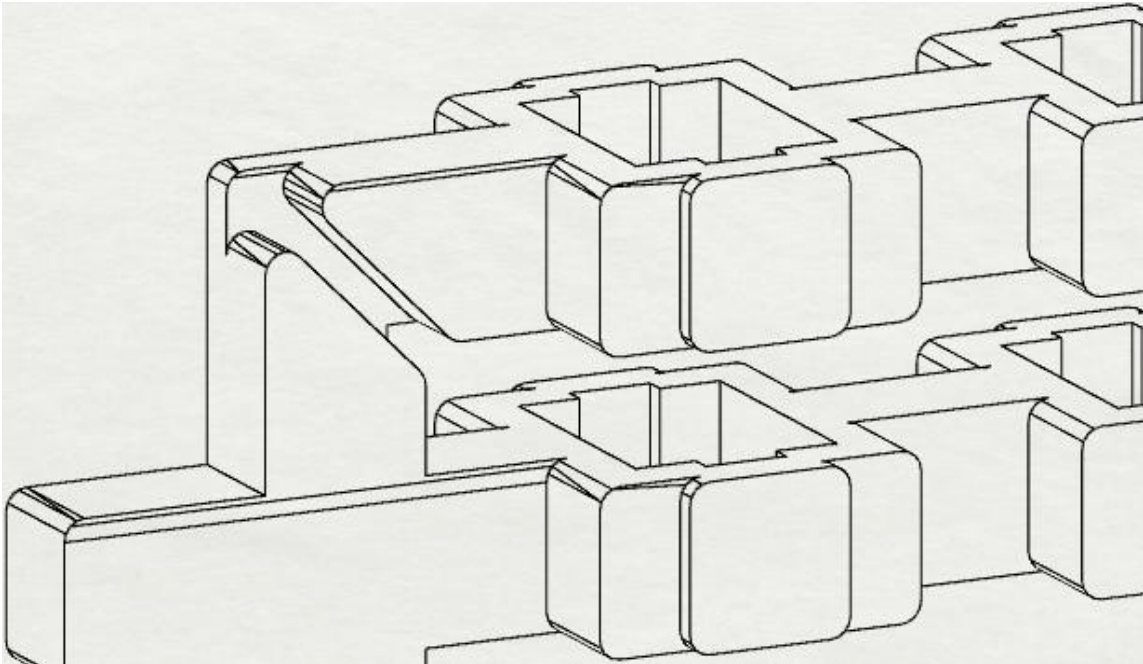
Sharp corner at sudden cross-section change in new testing mold design
